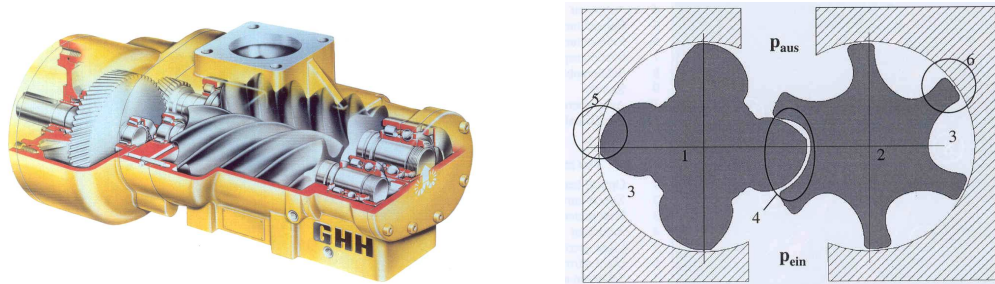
Dry screw compressor (left). Screw compressor frontal cross-section (right): 1 – male rotor, 2 – female rotor, 5 – male rotor-housing gap (considered clearance gap)
